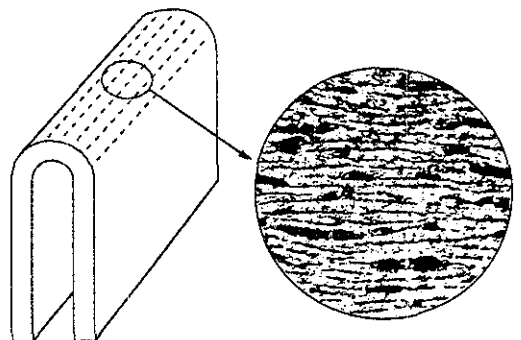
Schematic drawing of specimen after 180°bended tape test.
